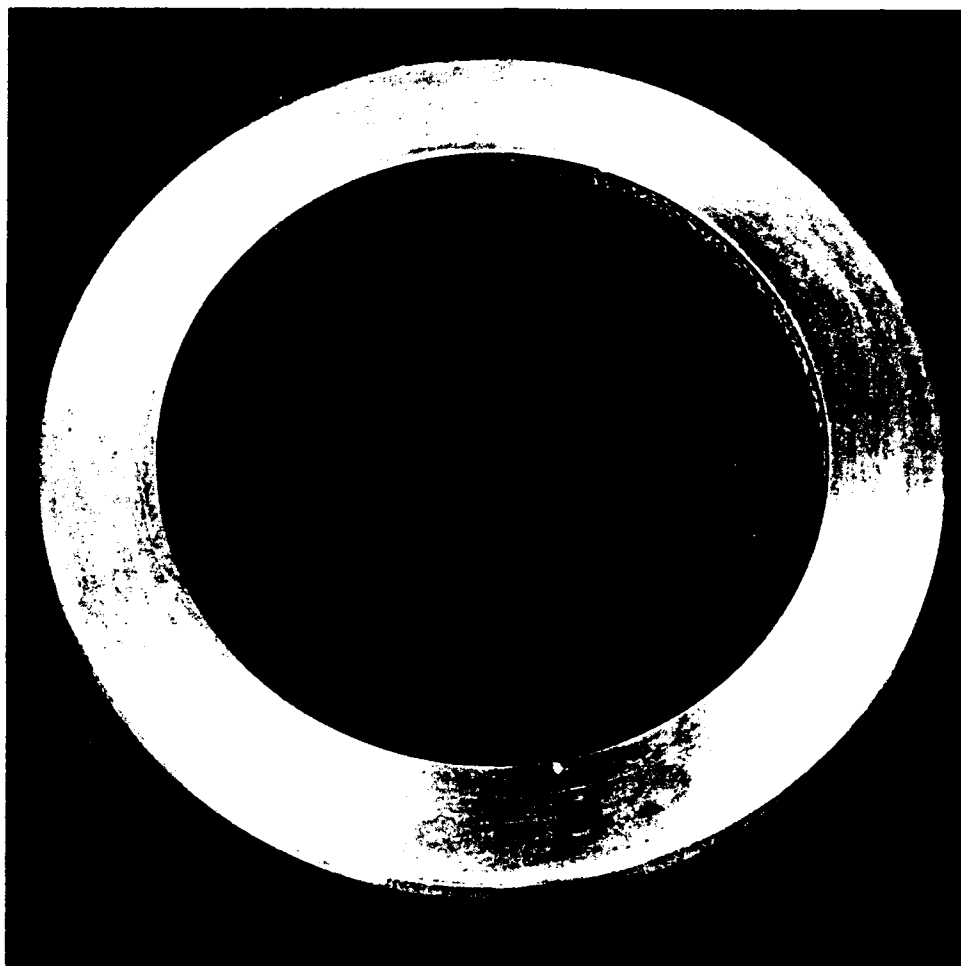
Experimental aluminum washer after being externally pressurized in a test assembly to 3,000 psi. The indentations resulting from the glass pipe pressing on the aluminum are just barely visible.
